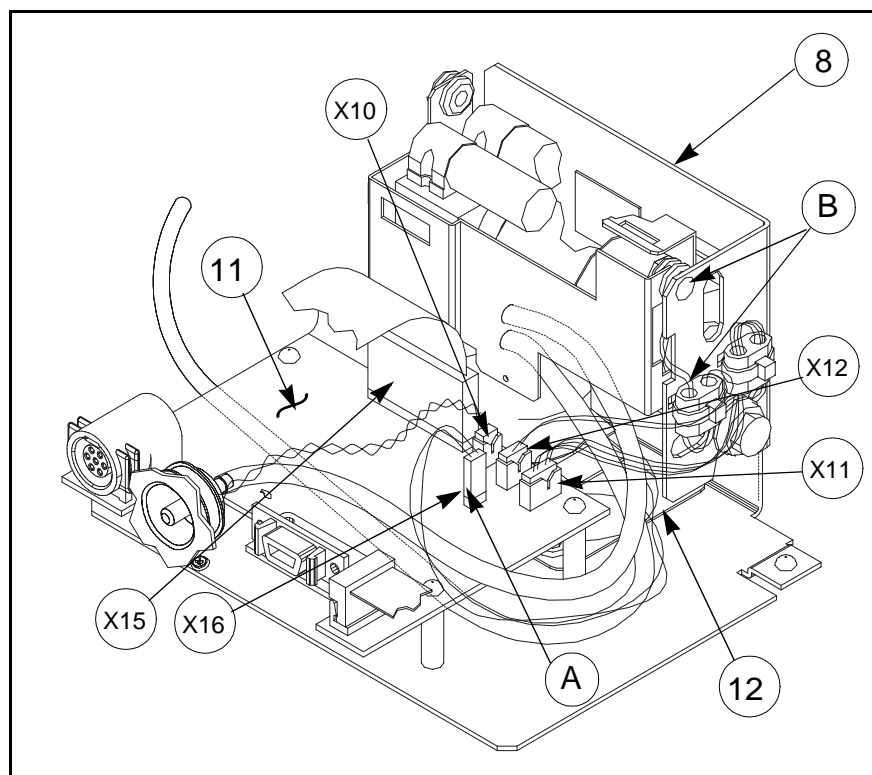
NBP Pump Subassembly (⑧) and Speaker (⑫) with front panel interface board of Connector I/O PCB Subassembly (⑪)
